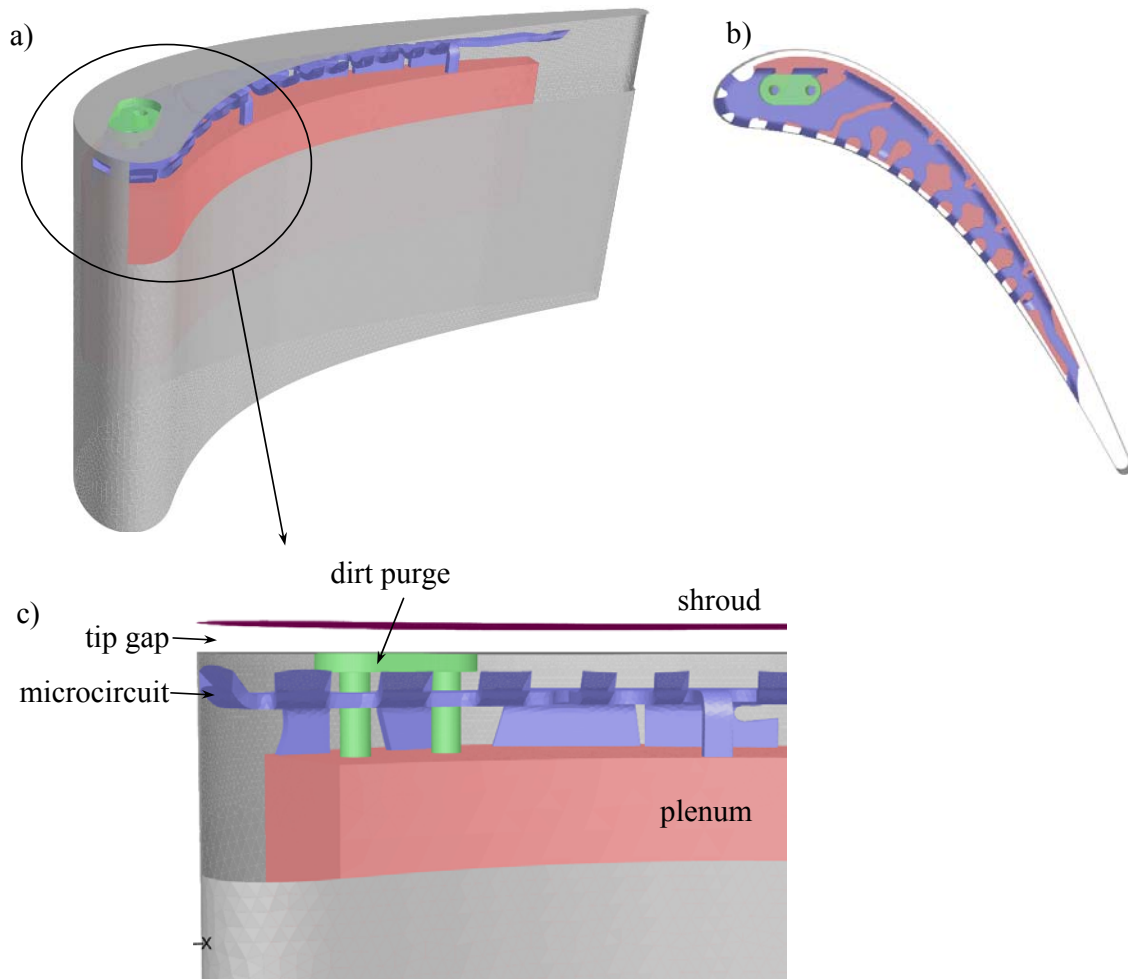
The microcircuit geometry that was tested in this study: a) an isometric view of the blade with part of the blade removed to show the air passages; b) a top view with the tip surface removed; c) a closer view detailing the dirt purge holes in green and the microcircuit passages in blue. Coolant to the dirt purge and microcircuit was supplied by the plenum shown in red (Hohlfeld, 2003).
